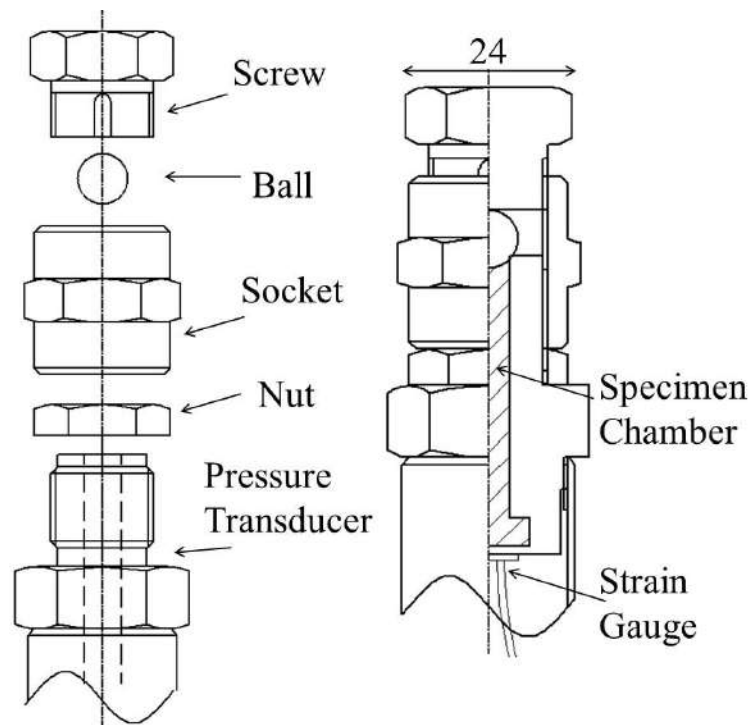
Tube (A) Many Parts, and (B) Assembled Parts with A Sectional View
